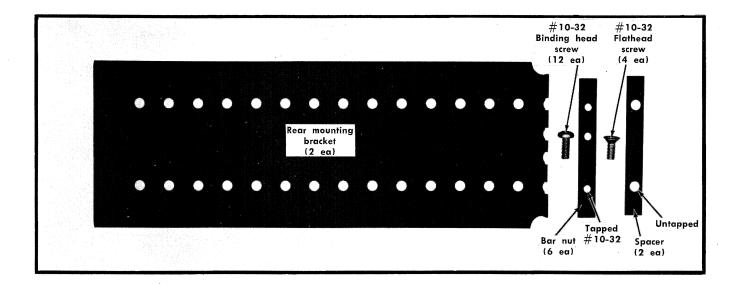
Small hardware components provided for mounting the stationary sections of the slideout tracks to the cabinet-rack rails.
